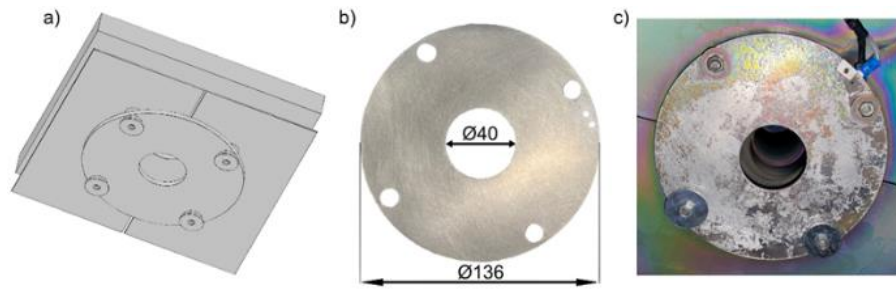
BSE plate design. a) 3D concept, b) machined plate and its main dimensions (4 mm thick), c) plate installed inside the EBW chamber with a deposited dust layer.
